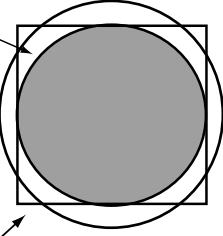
Footprint - 3 mils stencil - solder mask defined
